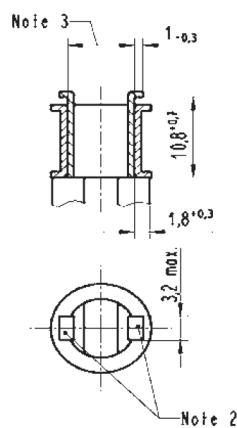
Gauge-piece and hand-key, D-type, Sizes D01-D03
